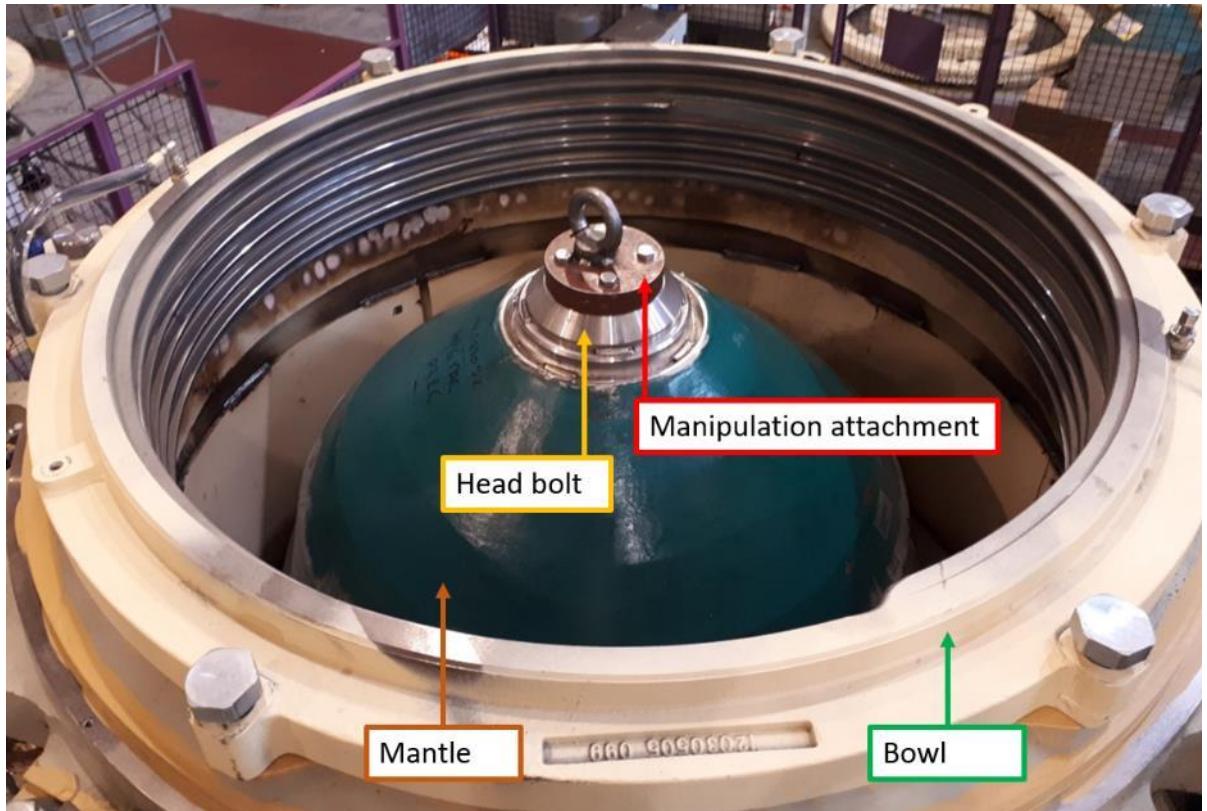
Placement of the head bolt during cone crusher assembly.
